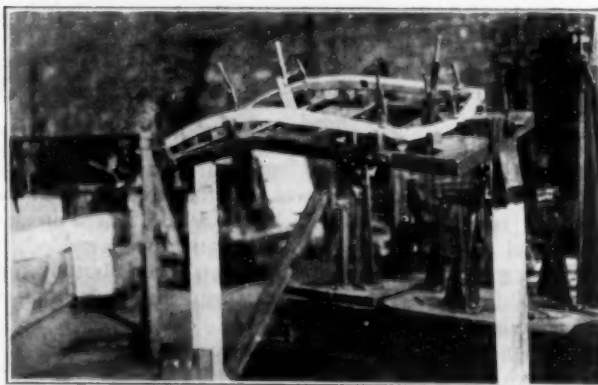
Jigs Used to Support Aluminum for Welding.
